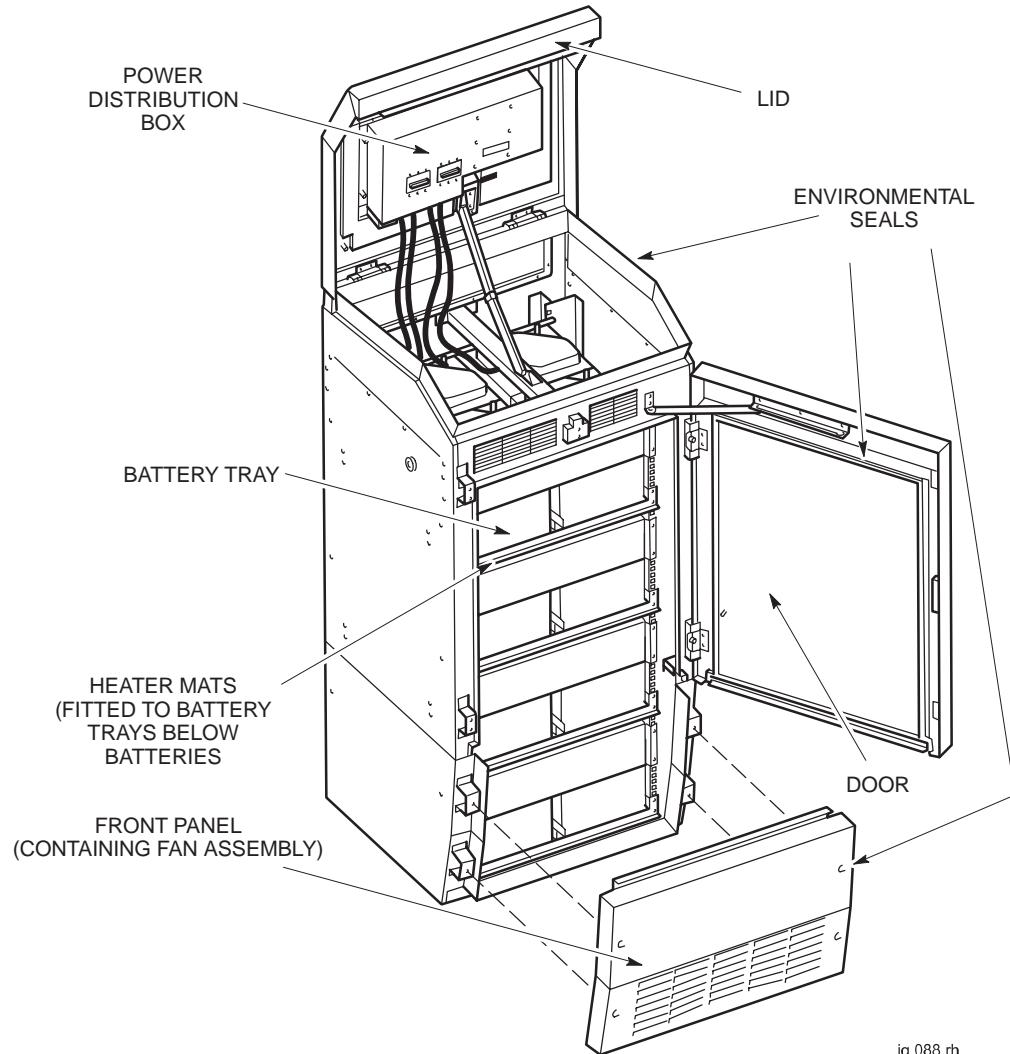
Auxiliary equipment housing, showing field replaceable units
